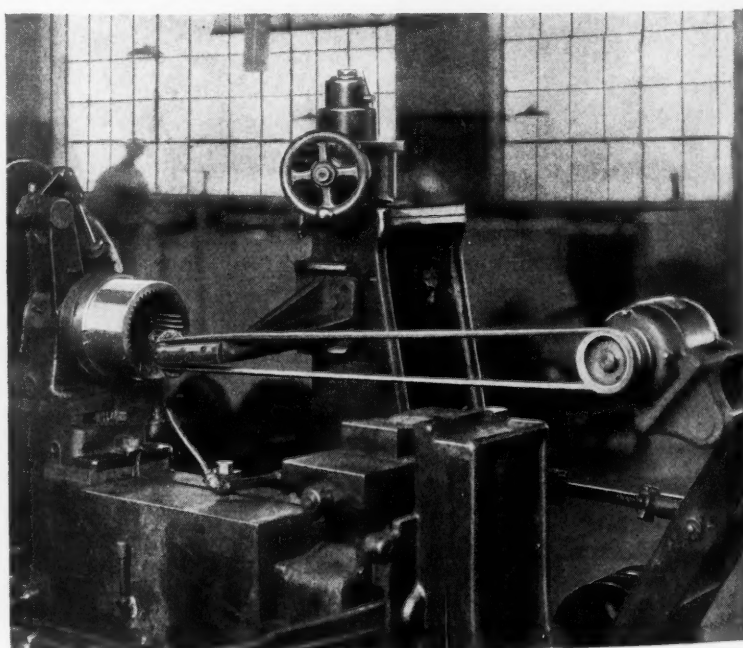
Ground-tooth Gears Have Contributed Materially to the Quietness of Automobile Transmissions
